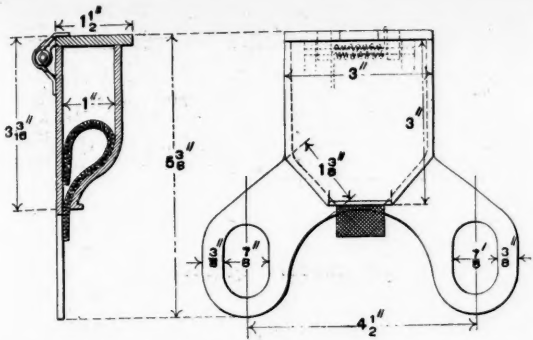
Valve Stem or Piston Rod Lubricator, Delaware & Hudson Co.
